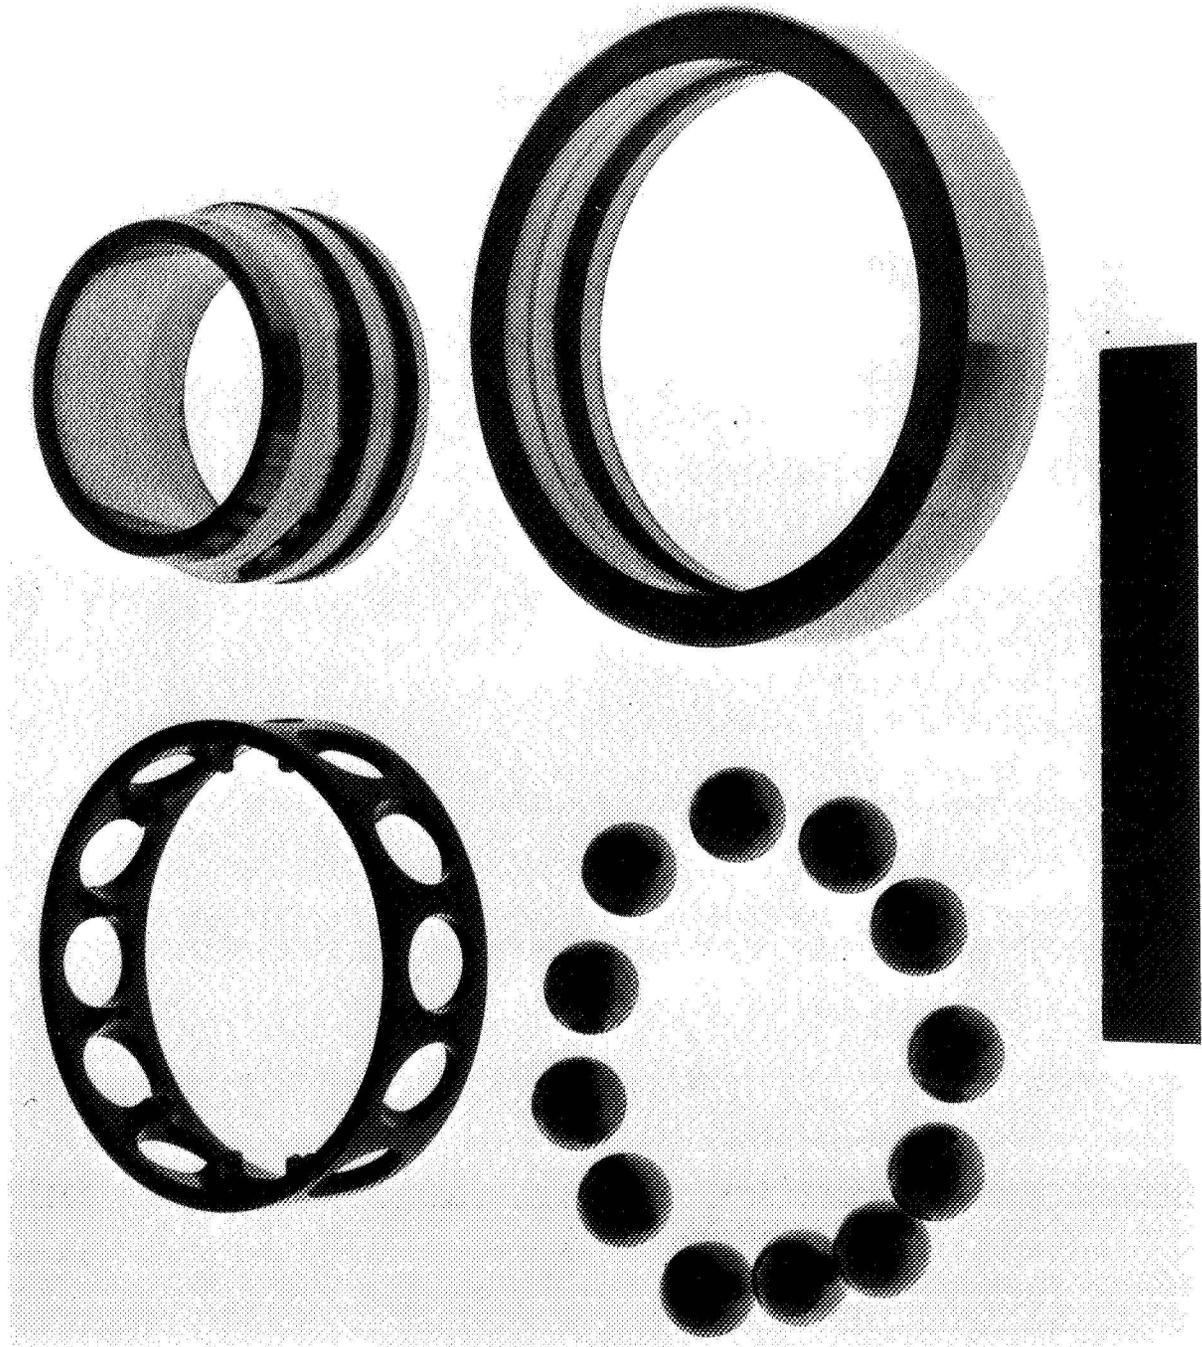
Motor End Bearings After 12,227.5 Hours Operation
